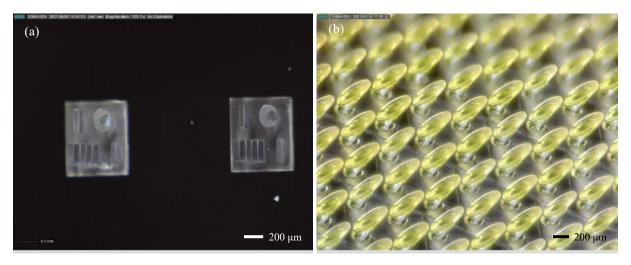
Printed master mold on silicon wafer: a) Multi-design structure panel array and b) gecko setae array
